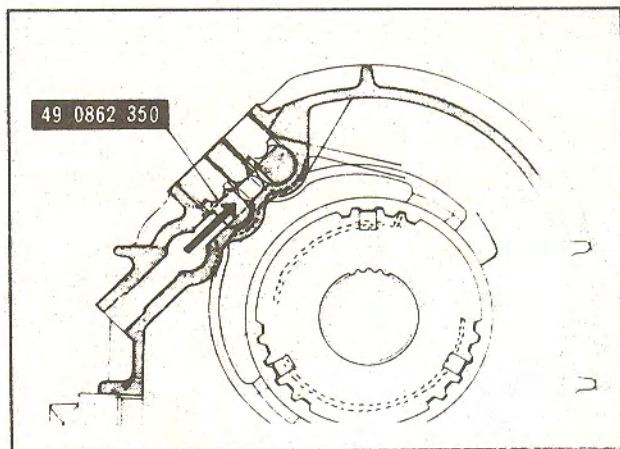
The special tool shown is used to insert the shift interlock pin into the bore holes. A rod of suitable diameter can also be used.
